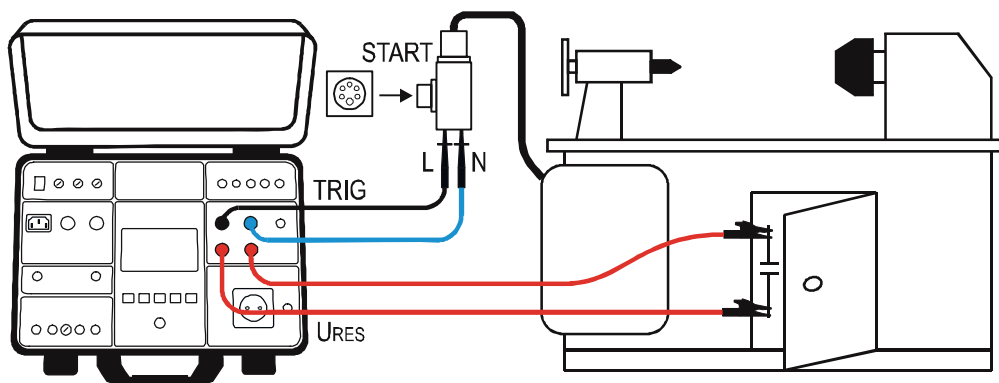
Connection for URES INT measurement on 1P/3P plugged machines
